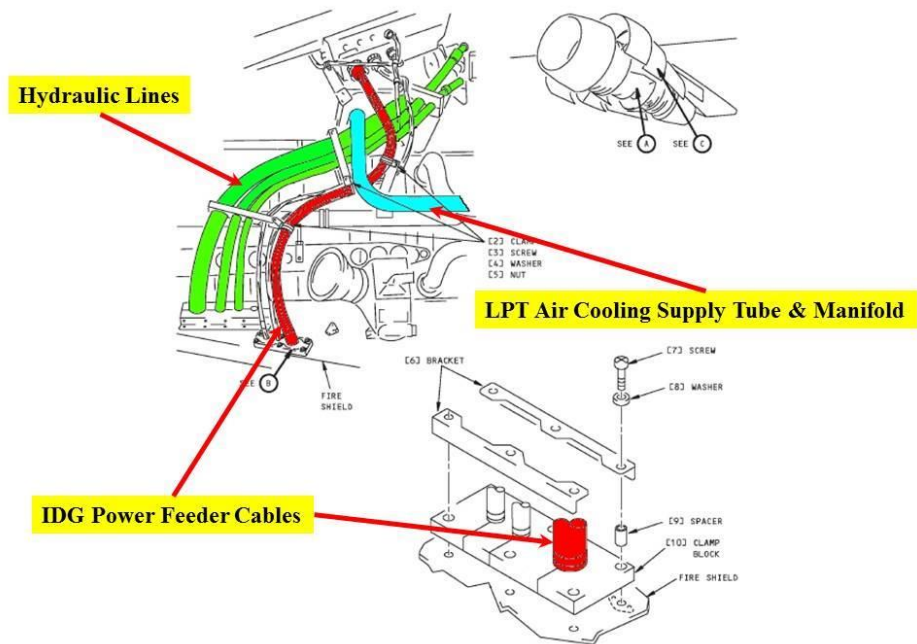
TYPICAL ILLUSTRATION OF IDG POWER FEEDER CABLE ROUTING ABOVE ENGINE HEATSHIELD IN THE BOEING 767 MANUALS
